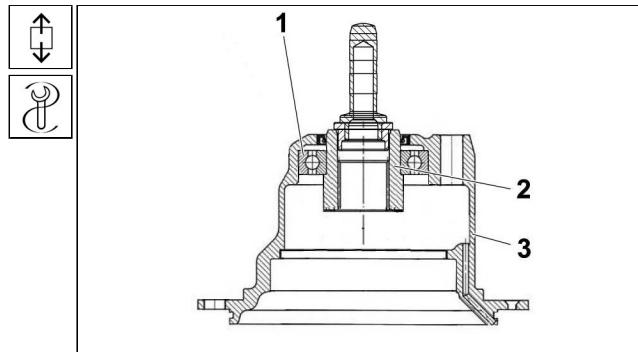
Removal of the front drive shift mechanism cover - 3
